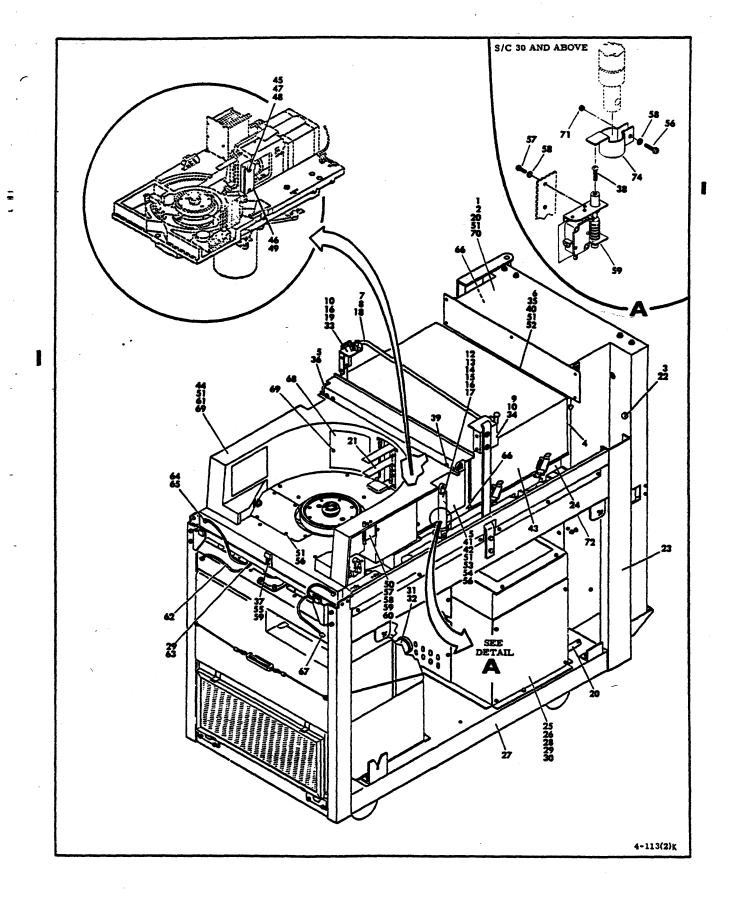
FINAL ASSEMBLY (SHEET 2)
